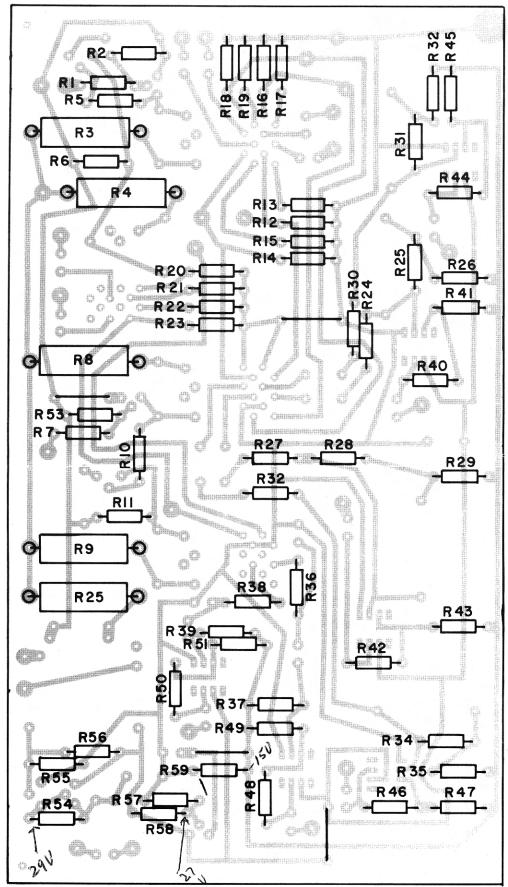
Circuit Board Assembly 139611 - Resistors Page 2 of 7
